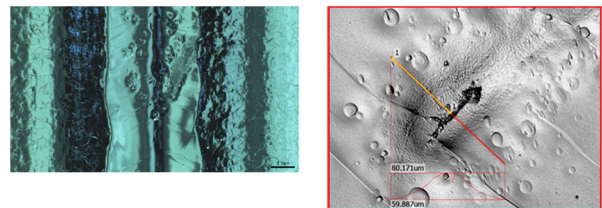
OBACHT image (left) and laser scanning microscopy result on a replica sample (right) of an etching erosion on the equator welding seam. A maximum E_{acc} of 15.9 MV/m due to quench could not be overcome even after tank removal, grinding, 40 μm EP, and 10 μm final BCP.
